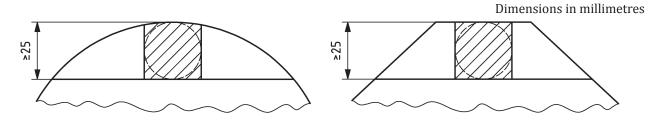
Diameter and the inscribed circle diameter of the test piece
